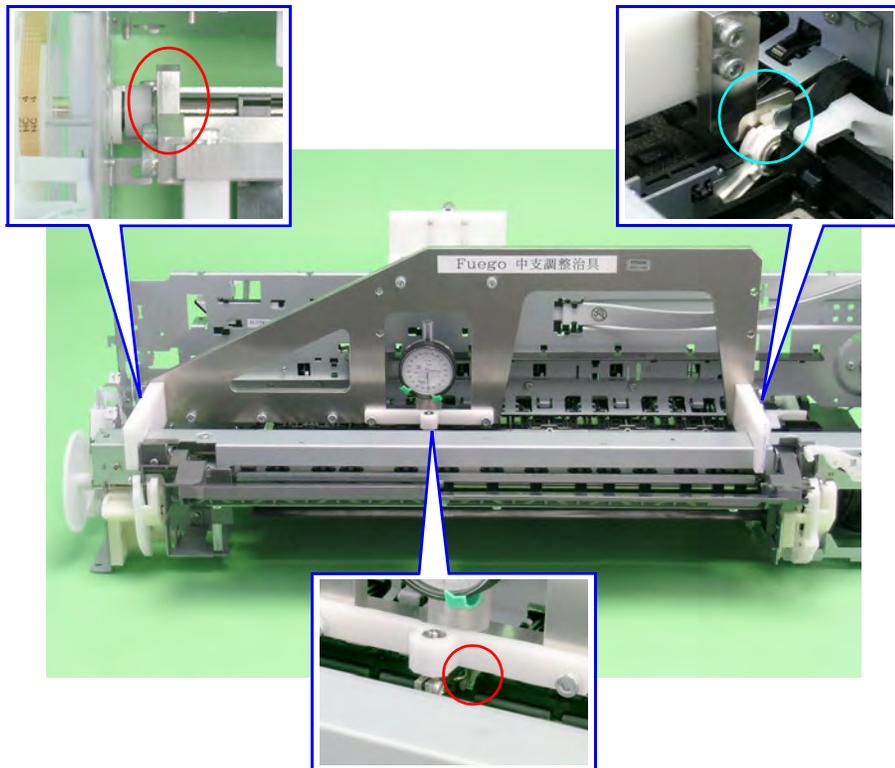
Setting the PF Roller Shaft Position Adjustment Jig (2)
